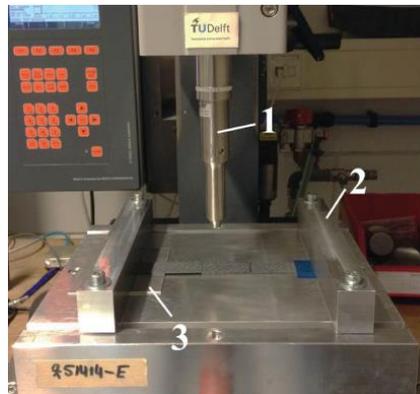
Ultrasonic welder and welding jig used in this study. 1: sonotrode, 2: bar clamp, 3: supporting plate for the upper adherend.
